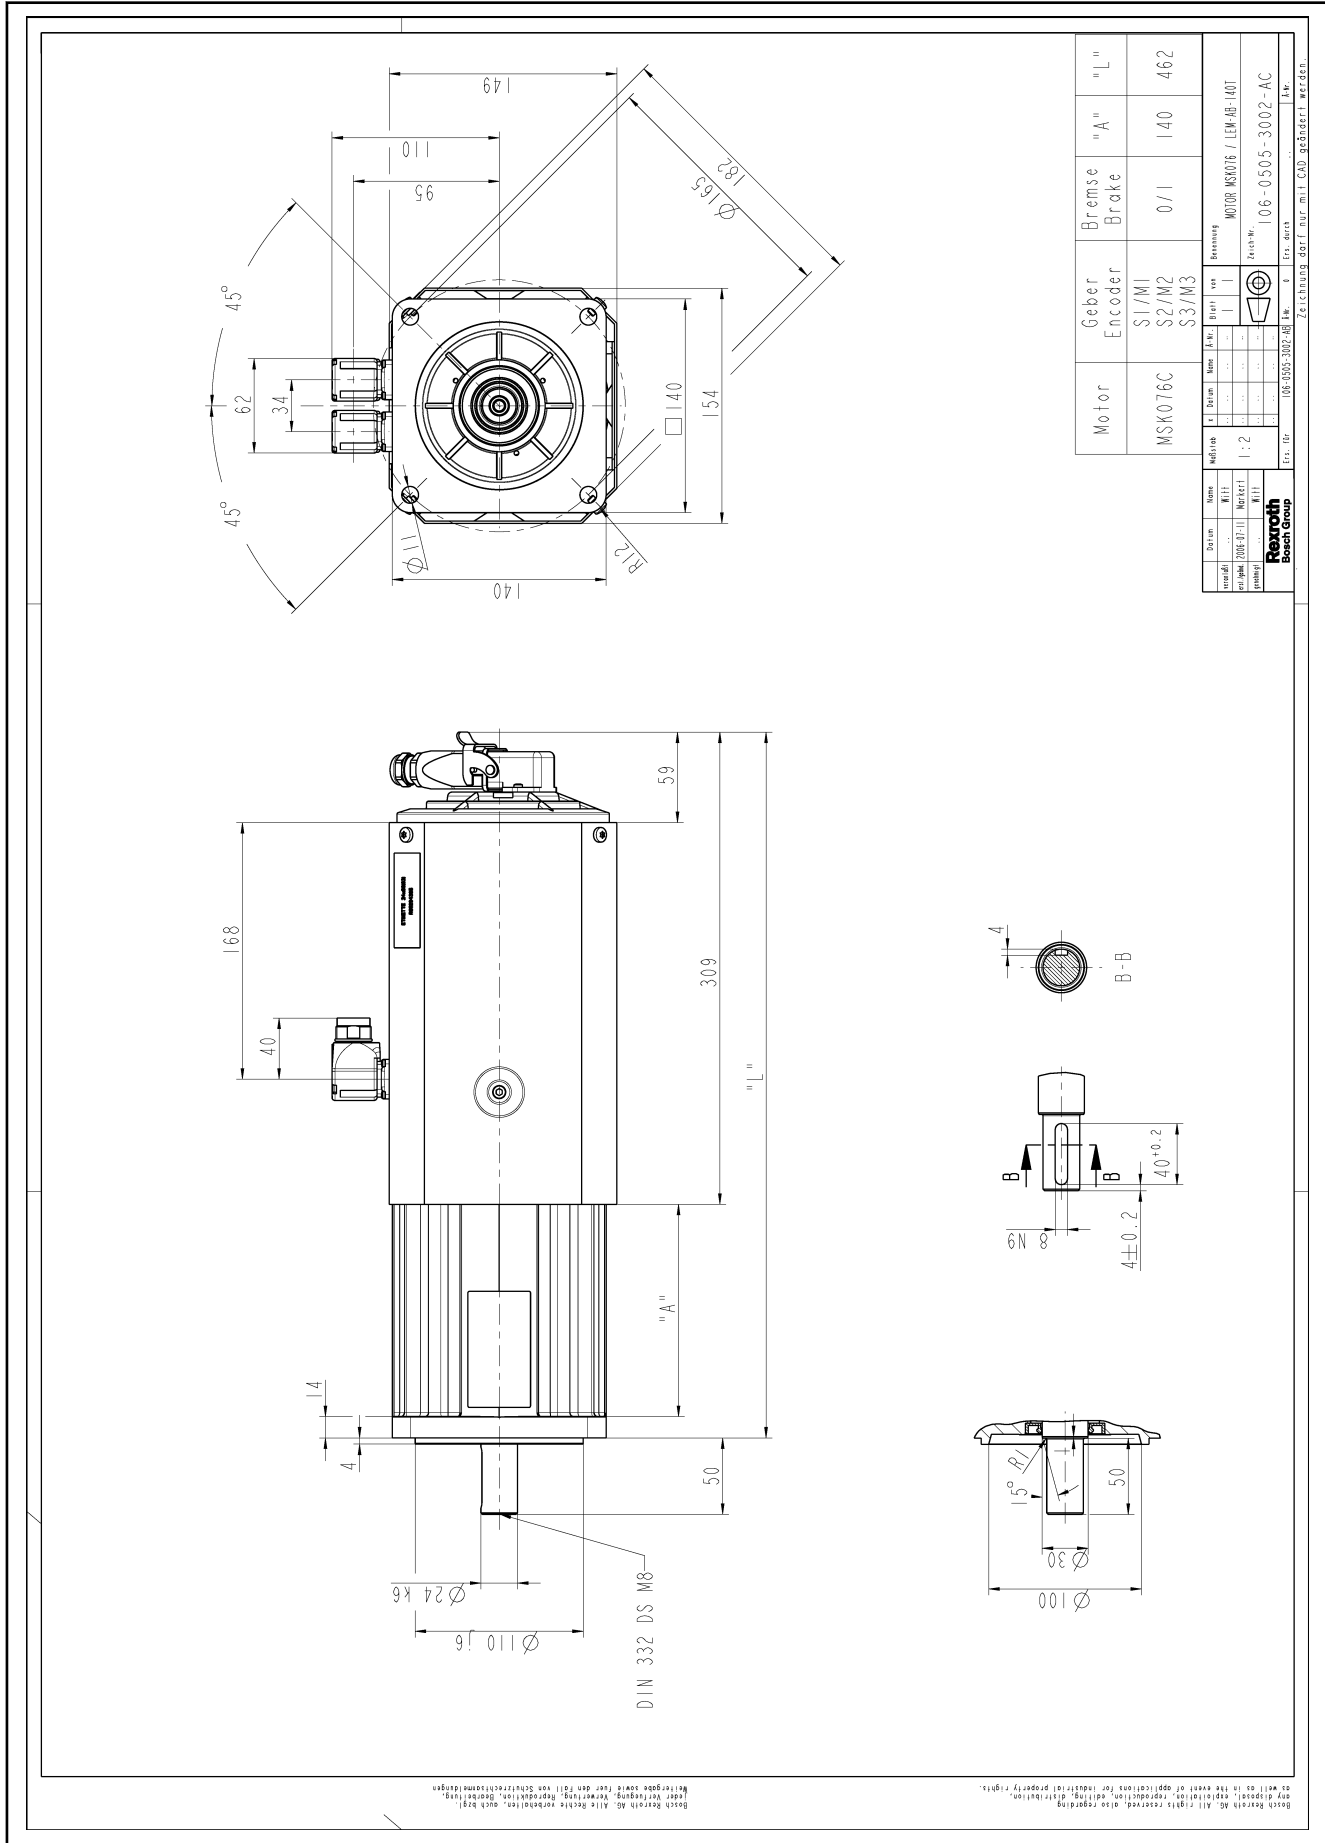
Dimension sheet MSK076 with axial fan unit
